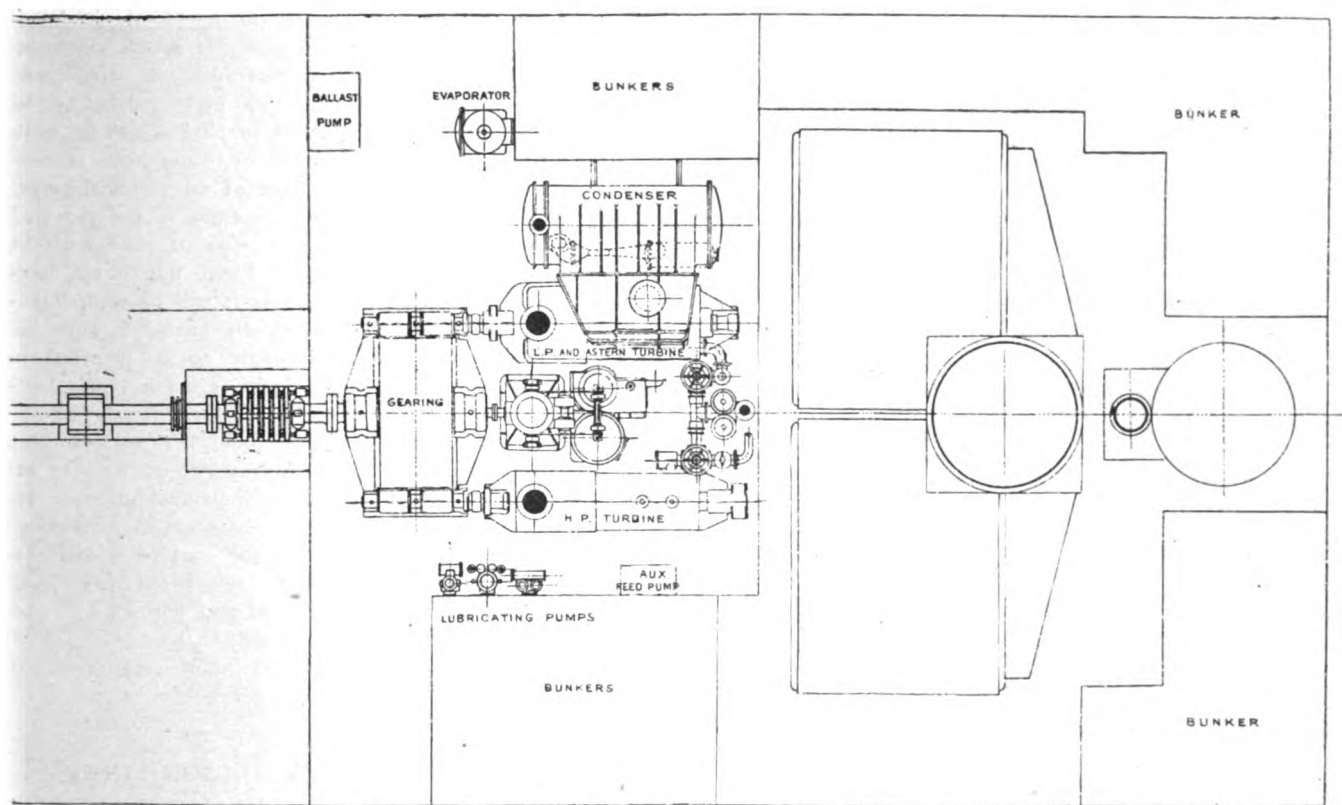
PLAN OF ENGINE AND BOILER ROOM SHOWING GENERAL ARRANGEMENT OF TURBINE MACHINERY.
